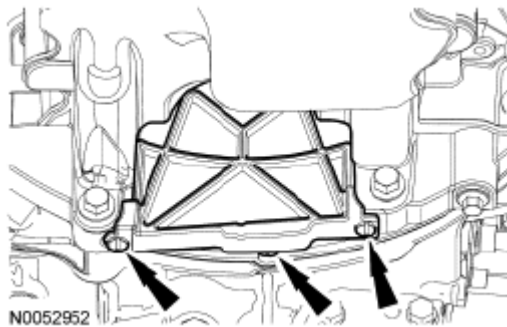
Locating Fasteners & Inspection Cover
